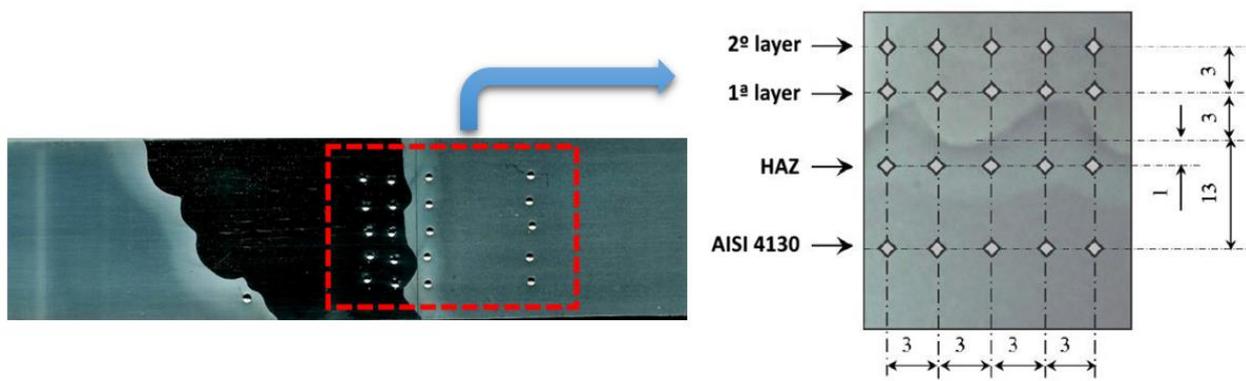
Location of weld joint hardness measurements in the transversal plan (measured in mm)
